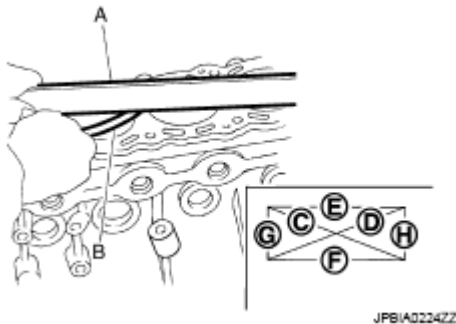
Measuring Distortion On Cylinder Block Upper Face
